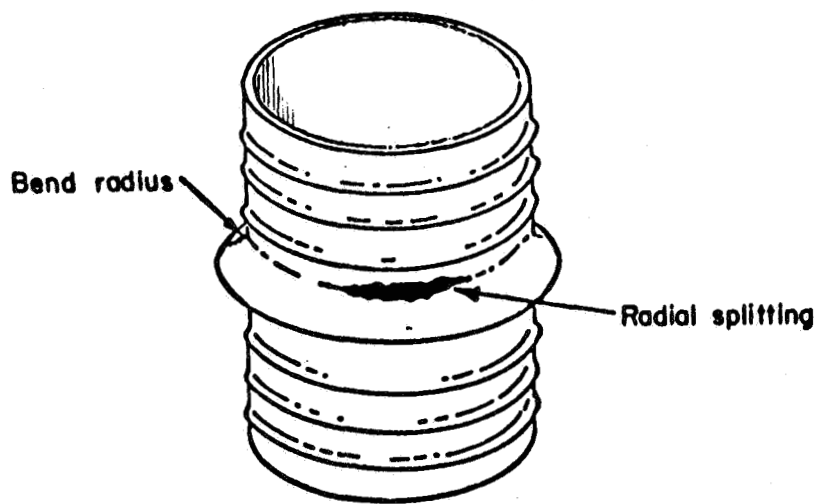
EXAMPLE OF FAILURE IN TUBE BULGING (REF. 35)
